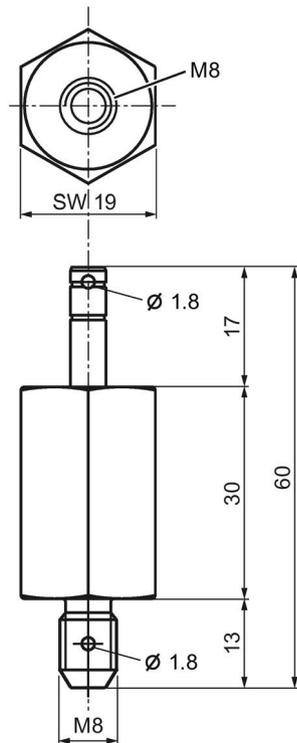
Dimension drawing of quick change holder 6GT2690-0AH00
